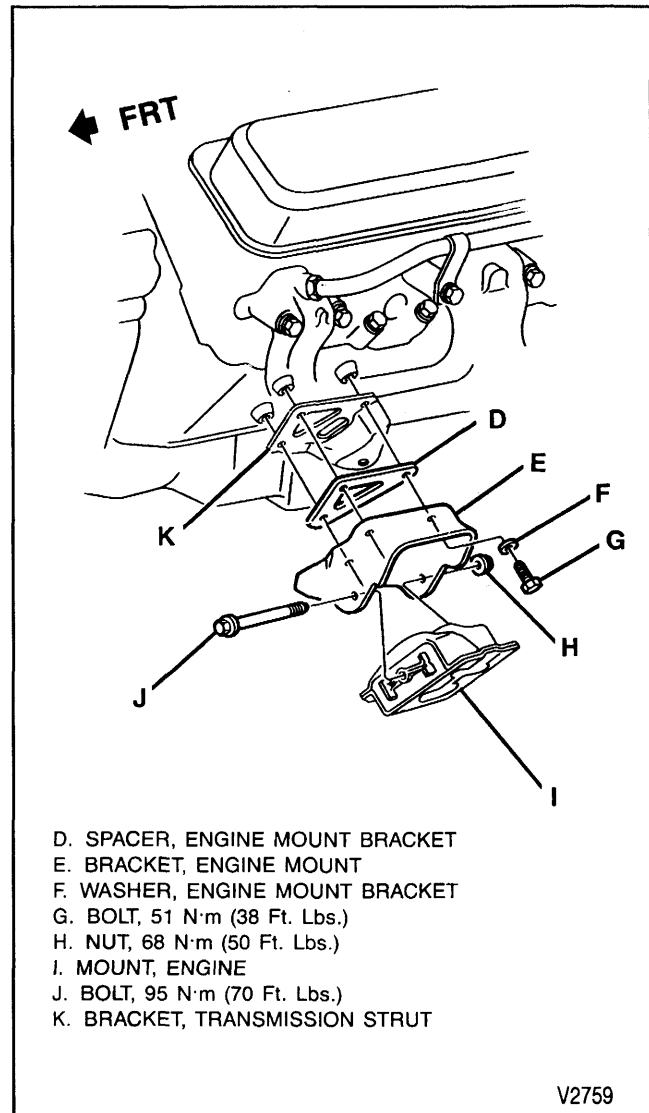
Front Engine Mounting Brackets (2WD and 4WD Models)
